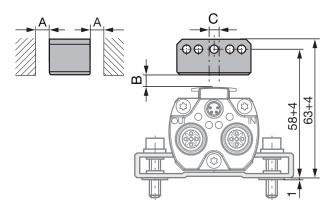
Dimensions and distances with BTL6-A-3801-2 magnet
